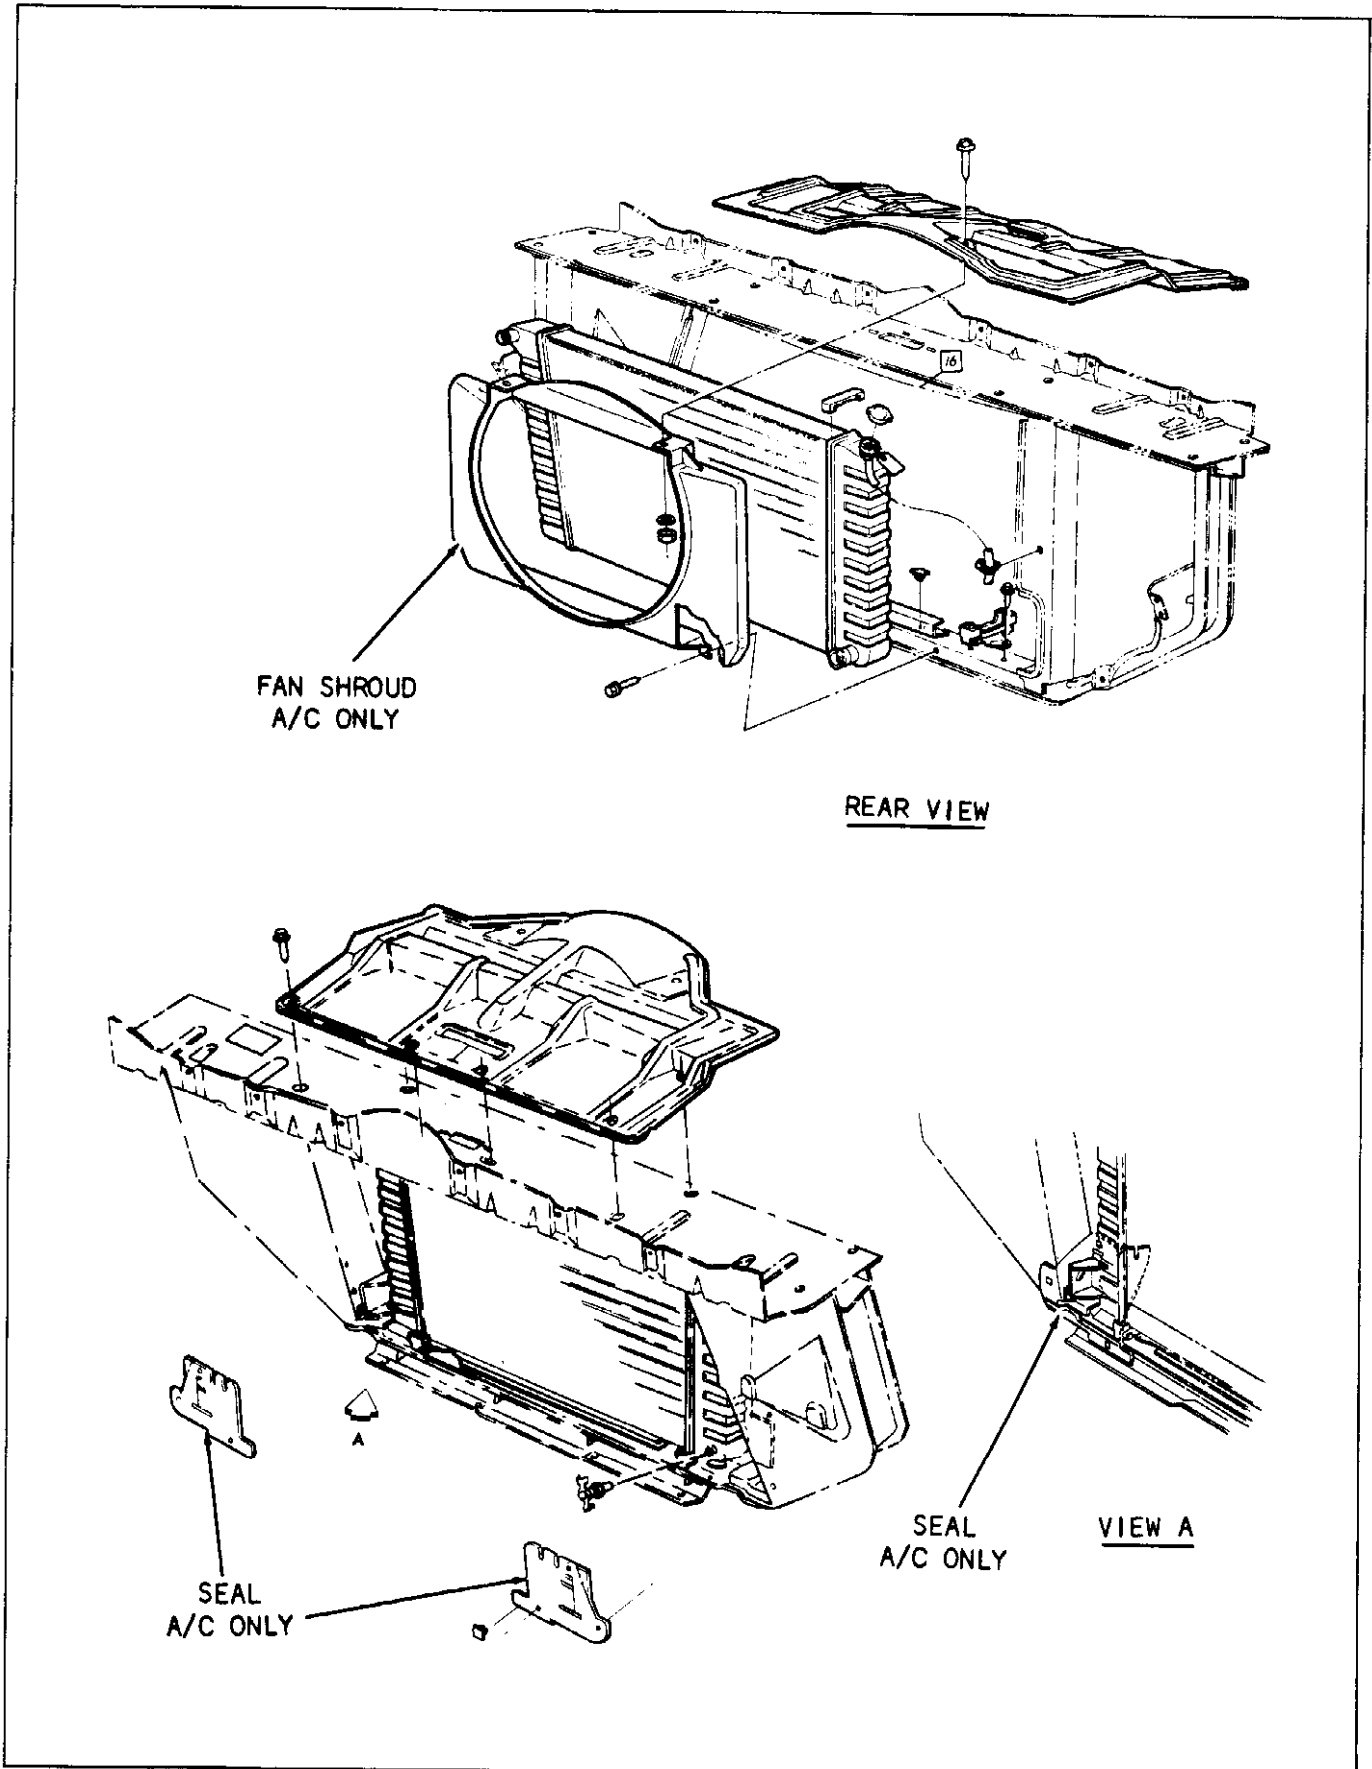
Support and Baffle Assembly (Pontiac)
